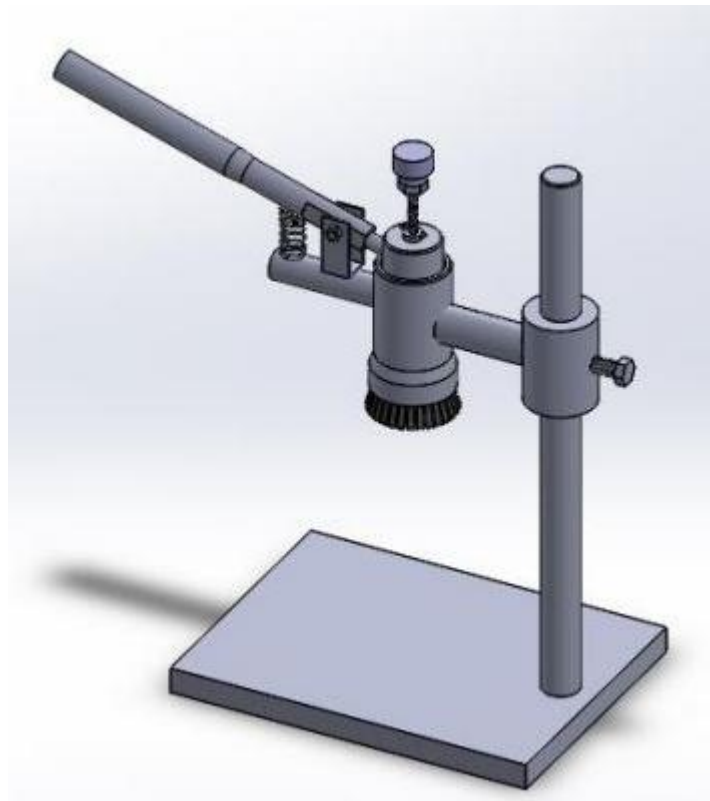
Design of Perfume Bottle Crimping Sprayer Press Tool
